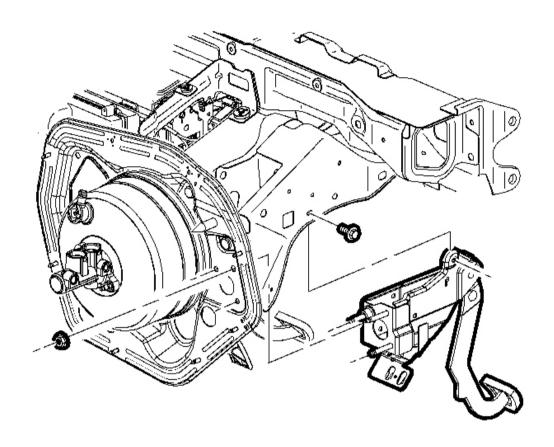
Clutch Pedal Assembly, Studs & Nuts Courtesy of GENERAL MOTORS CORP.
